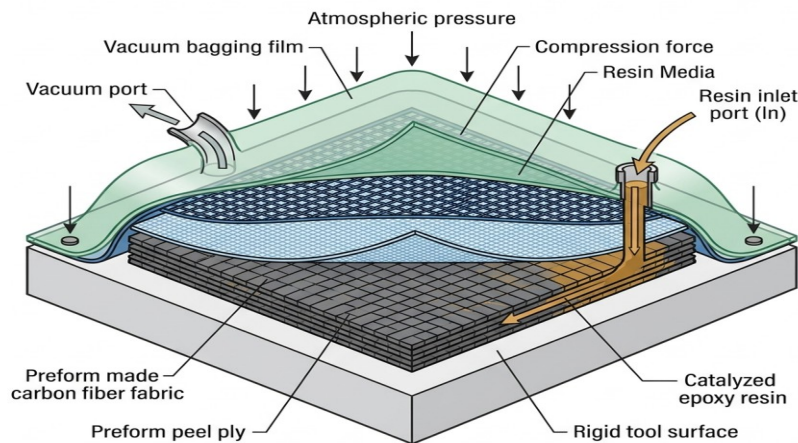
Comprehensive Schematic of Vacuum Assisted Resin Transfer Molding Setup
